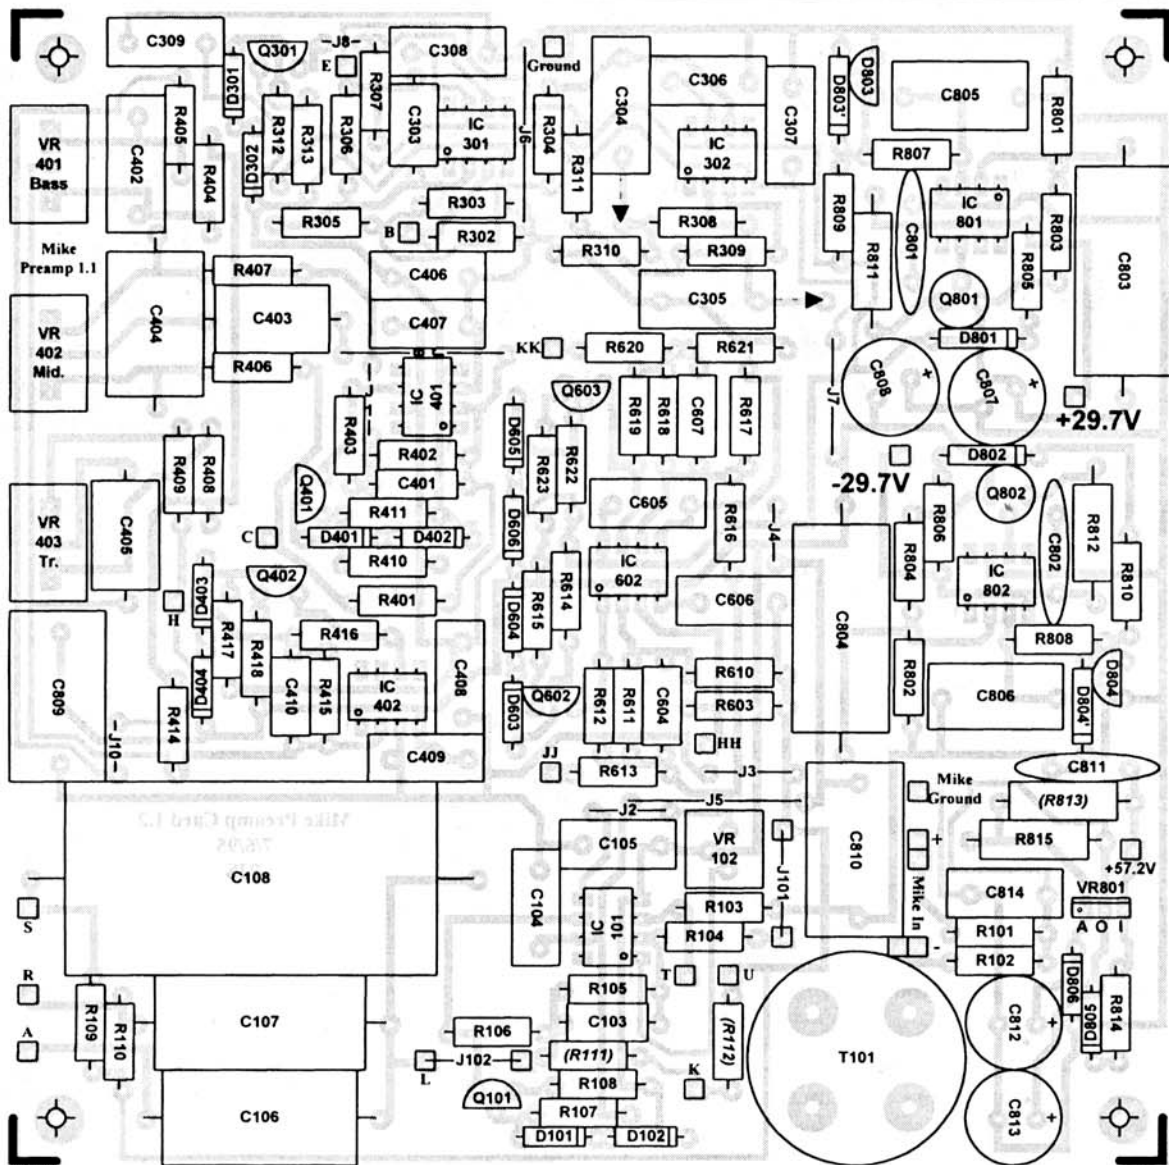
Mike preamp card: printed circuit board and parts layout. The transformer mounts in the four screw-holes on the board; two are for mounting screws, two are for wire leads. There are ten jumpers (in addition to J101 and J102, used to select "chimp-proof" operation) that are indigenous to the board, numbered J1-J10.
